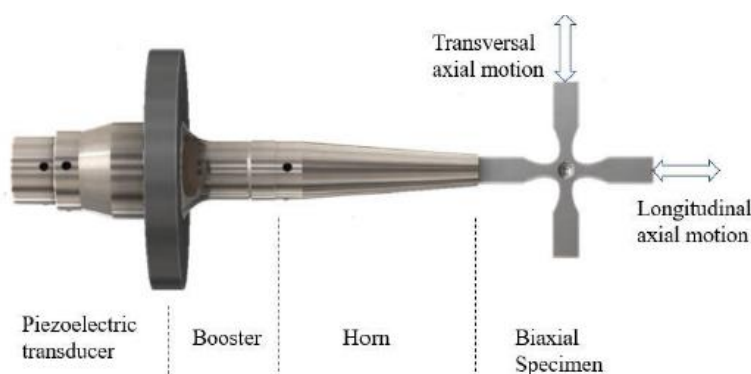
Ultrasonic fatigue testing assembly with cruciform specimen.
